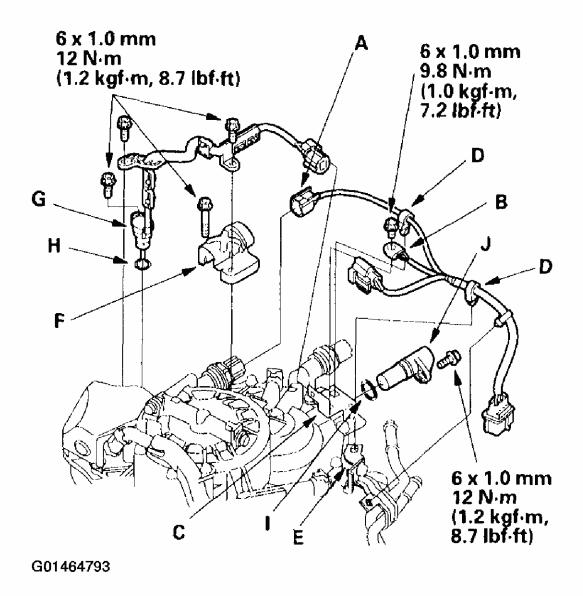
Connecting The 3rd Clutch Transmission Fluid Pressure Switch
